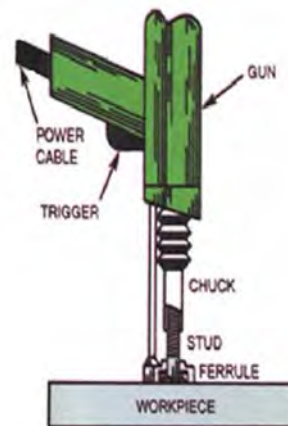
Arc stud welding gun in position to weld.
